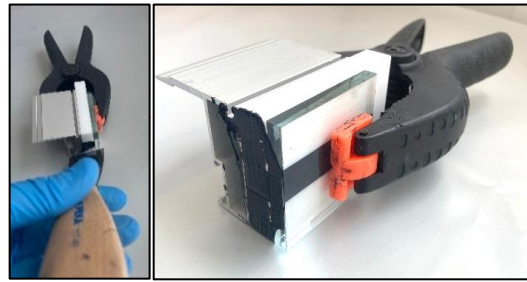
Remove excessive adhesive to ensure a proper, smooth and uniform adhesive surface
